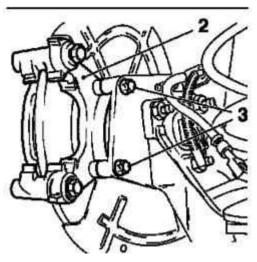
Withdrawal of the guide blocks: 1 - brake hose, 2 - guide pads 3 - Bolts
